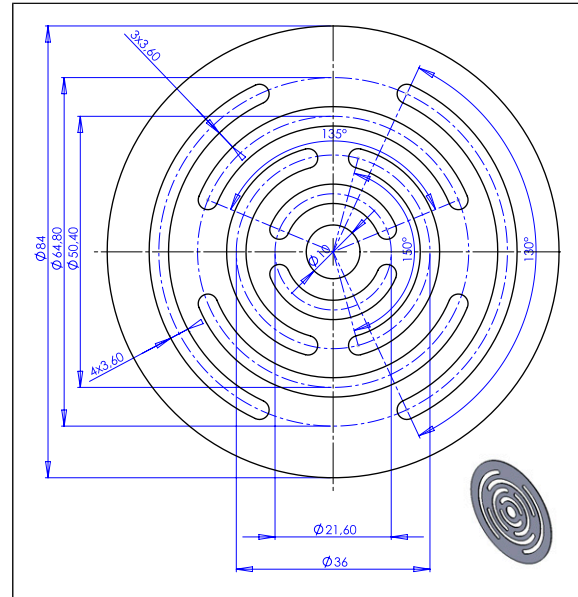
Geometry of the damper and its dimension. Its thickness is about 0.6 mm.
